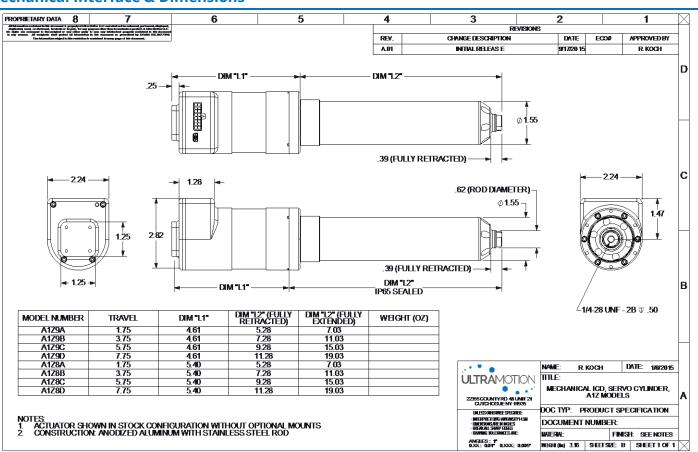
Mechanical Interface Control Drawing for A1Z series actuators
